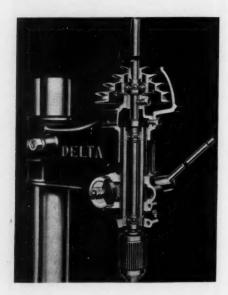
Horizontal applications, such as this drill press, have successfully employed sealed units
